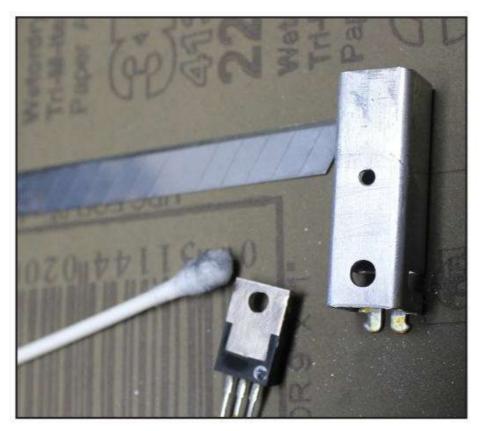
Photo B. Cleanup tools ... a machinist's parallel strip for scraping, fine sandpaper and a Q-Tip®.
